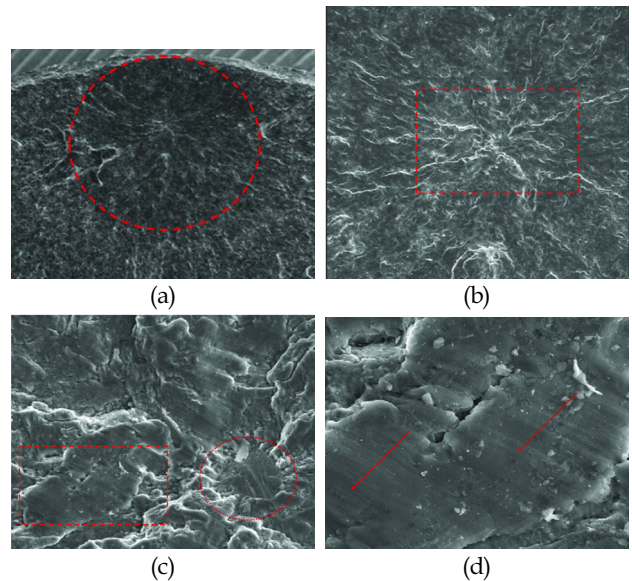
(a); Magnified view of a fish eye crack at UNSM-treated specimen, (G), (b); magnified view of Fig. 7 (a), (c); crack initiation site of Fig. 7 (a): facet type, (d); ductile striation observed beside of crack initiation site of Fig. 7 (c). Arrows indicate growth direction of G-crack
